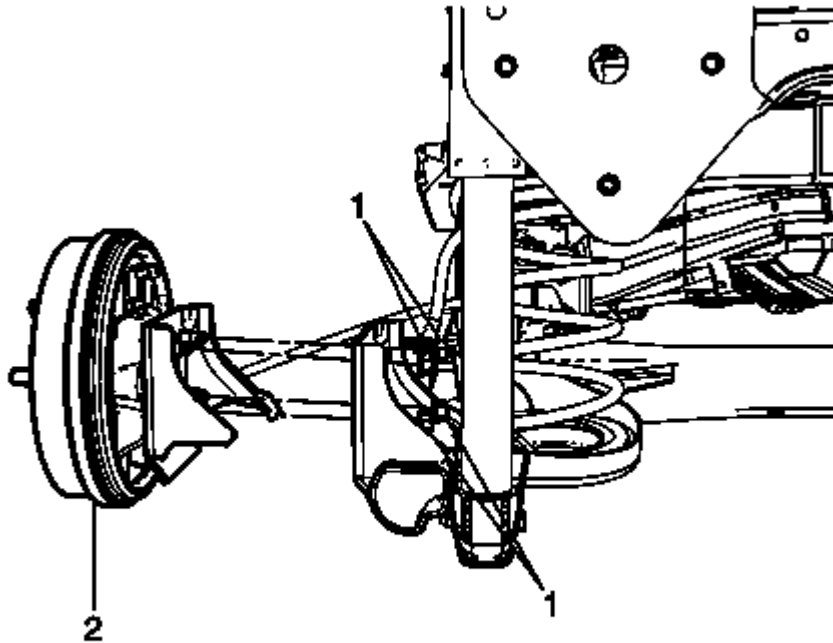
Rear Axle Retaining Nuts And Backing Plates As An Assembly
